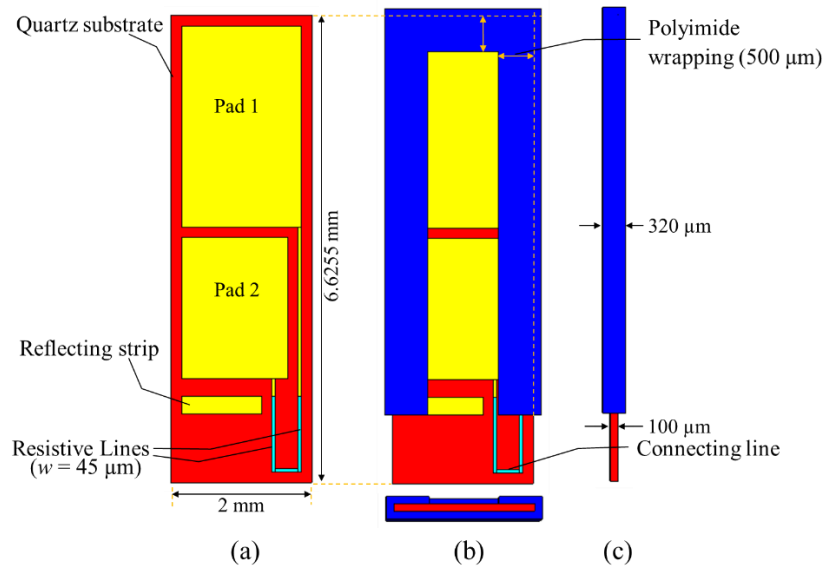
(a) sensor chip, (b) front view and bottom view, (c) side view of chip wrapped in polyimide.
